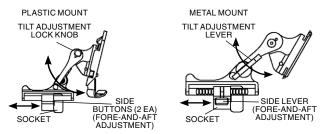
TILT AND FLIP-UP ASSEMBLY MECHANISMS
